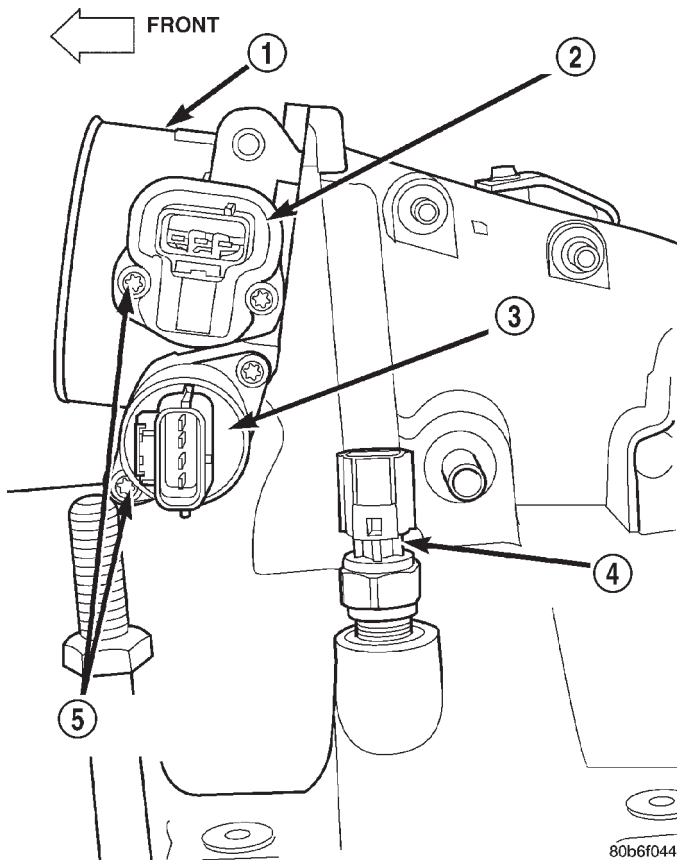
Intake Manifold Air Sensor Location—4.7L V-8 Engine
